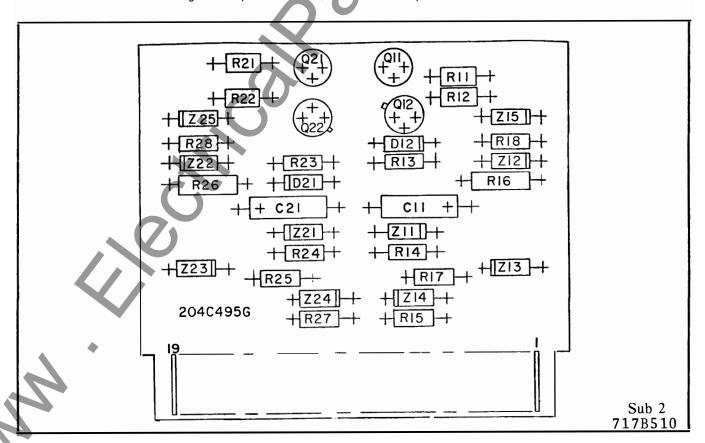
Component Location of Buffer Keying Dircuit Board.
